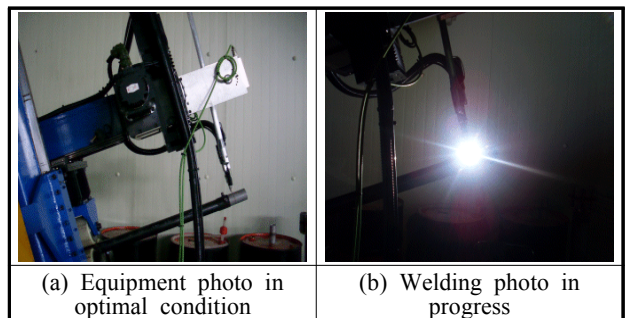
Welding pictures in TIG welding optimal condition
